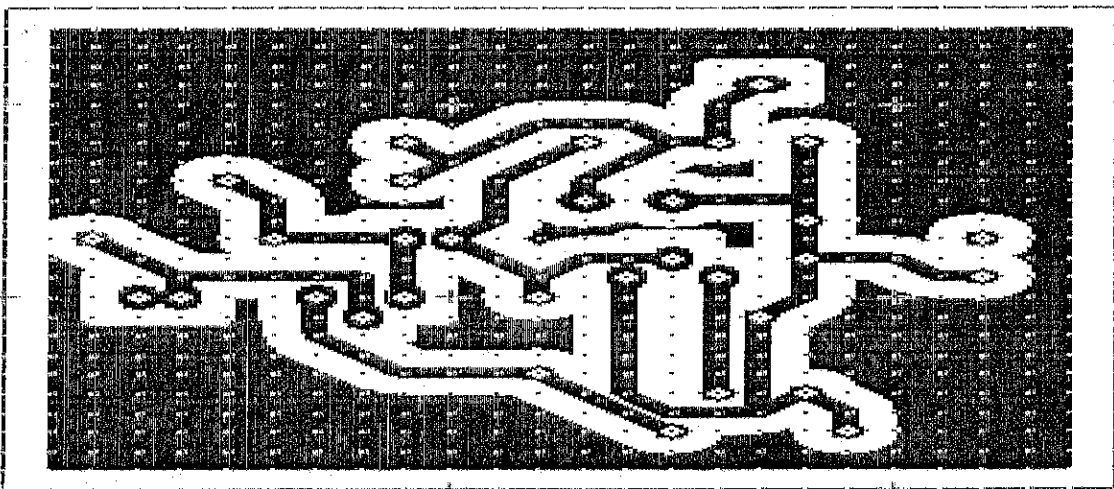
PCB layout of the FM transmitter (pdfview)
